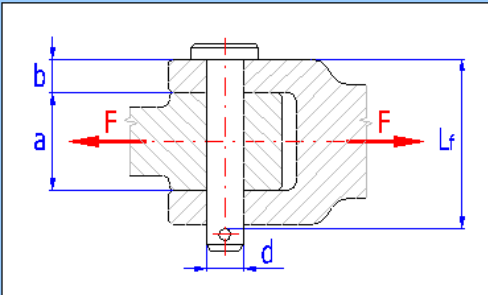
MITCalc – Calculation of the Guiding Wheel Axle – Design of coupling dimensions.
